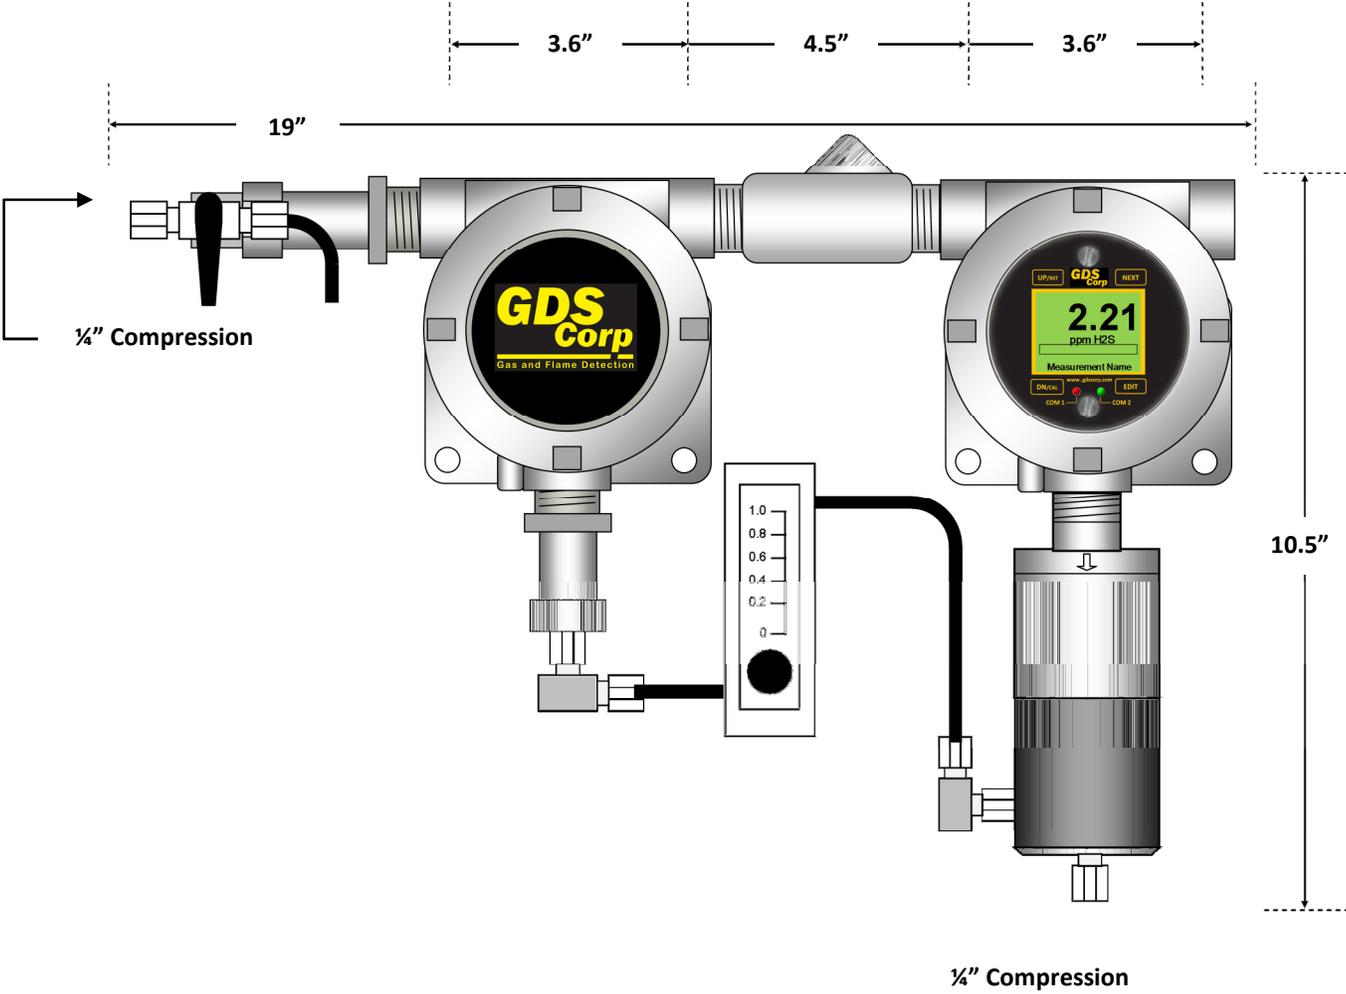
GDS-58NXP Dimensions (Stainless Steel Enclosure)
